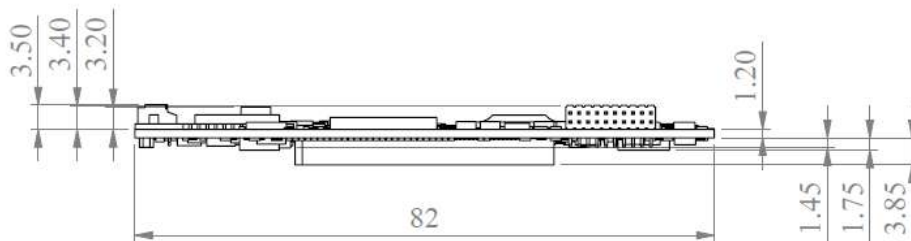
Mechanical dimension of i.MX8M SMARC SOM- Side View
